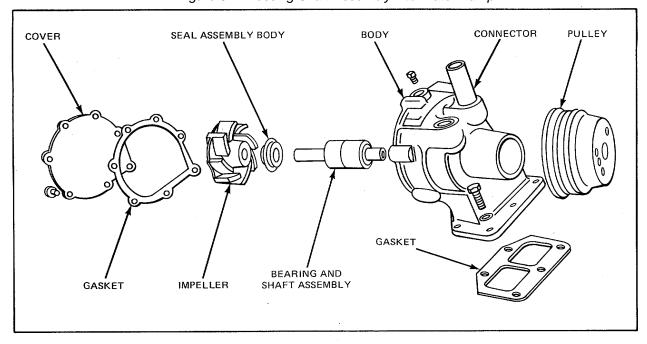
Fresh Water Pump Details and Relative Location of Parts
